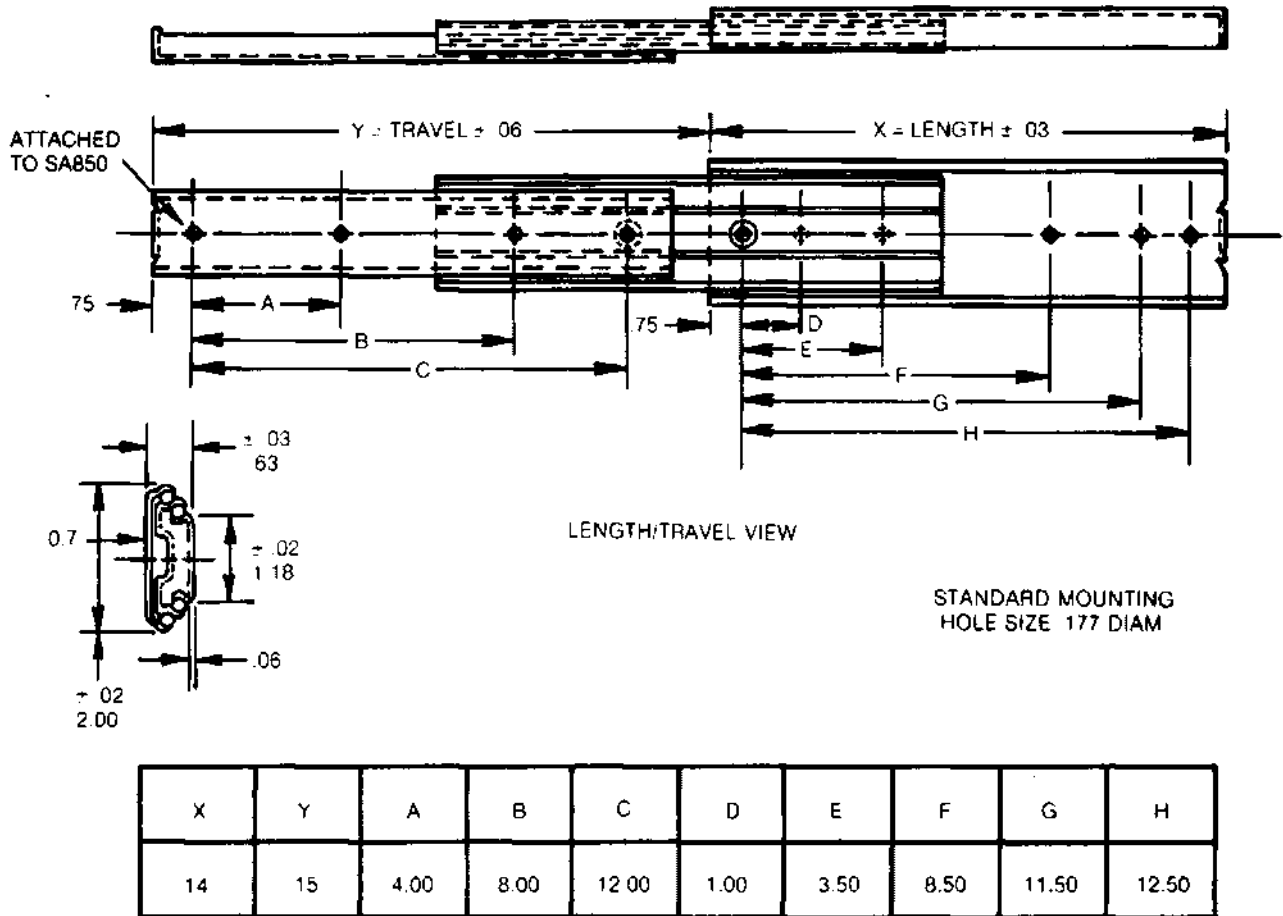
SLIDE MOUNTING DIMENSIONS
